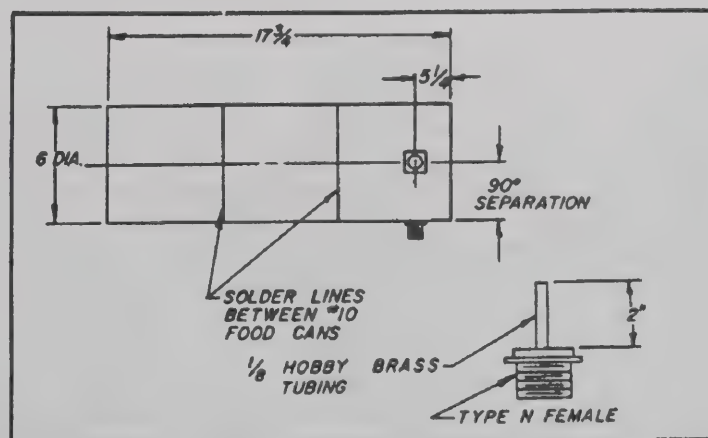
Feed horn and radiator probes. Dimensions in inches.
